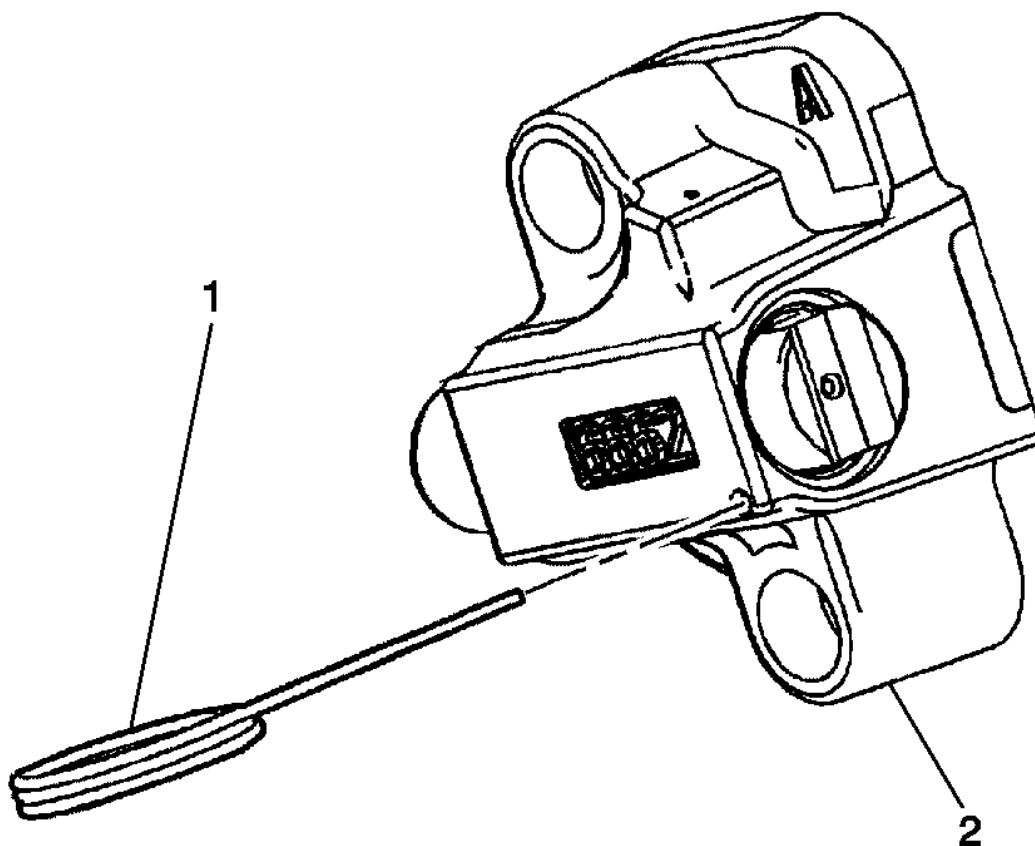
View Of J 45027 & Left Secondary Camshaft Drive Chain Tensioner Plunger
